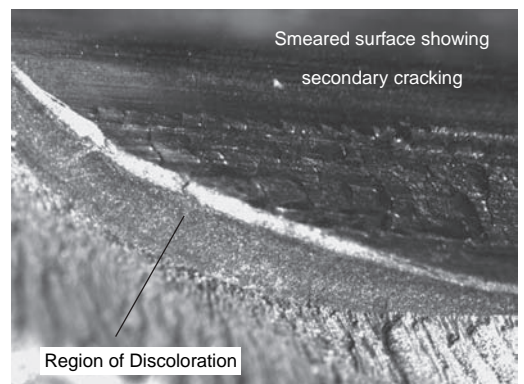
Rough machining at the surface of the tooth showing smearing and tearing of the machined surface. This is suggestive of abusive machining, due to dull cutting tools, inadequate coolant, or excessive speeds and feeds.
